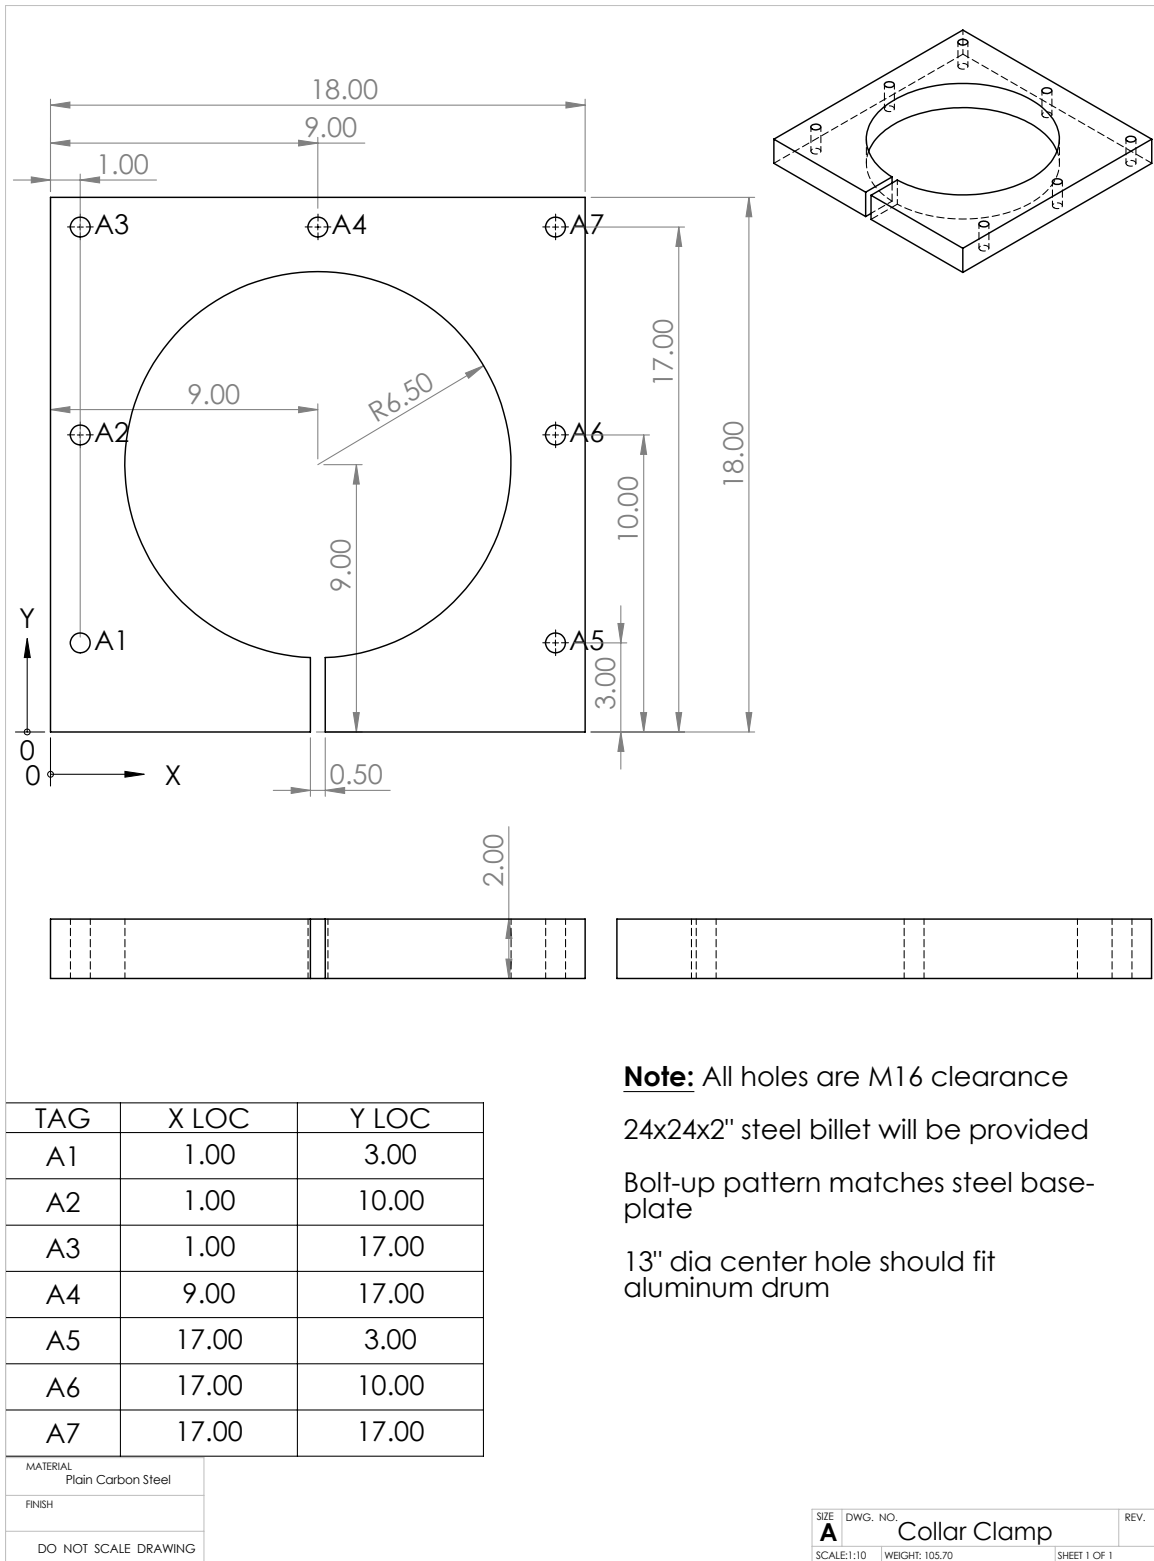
Steel collar clamp used to set yaw angle. Dimensions are in inches.
